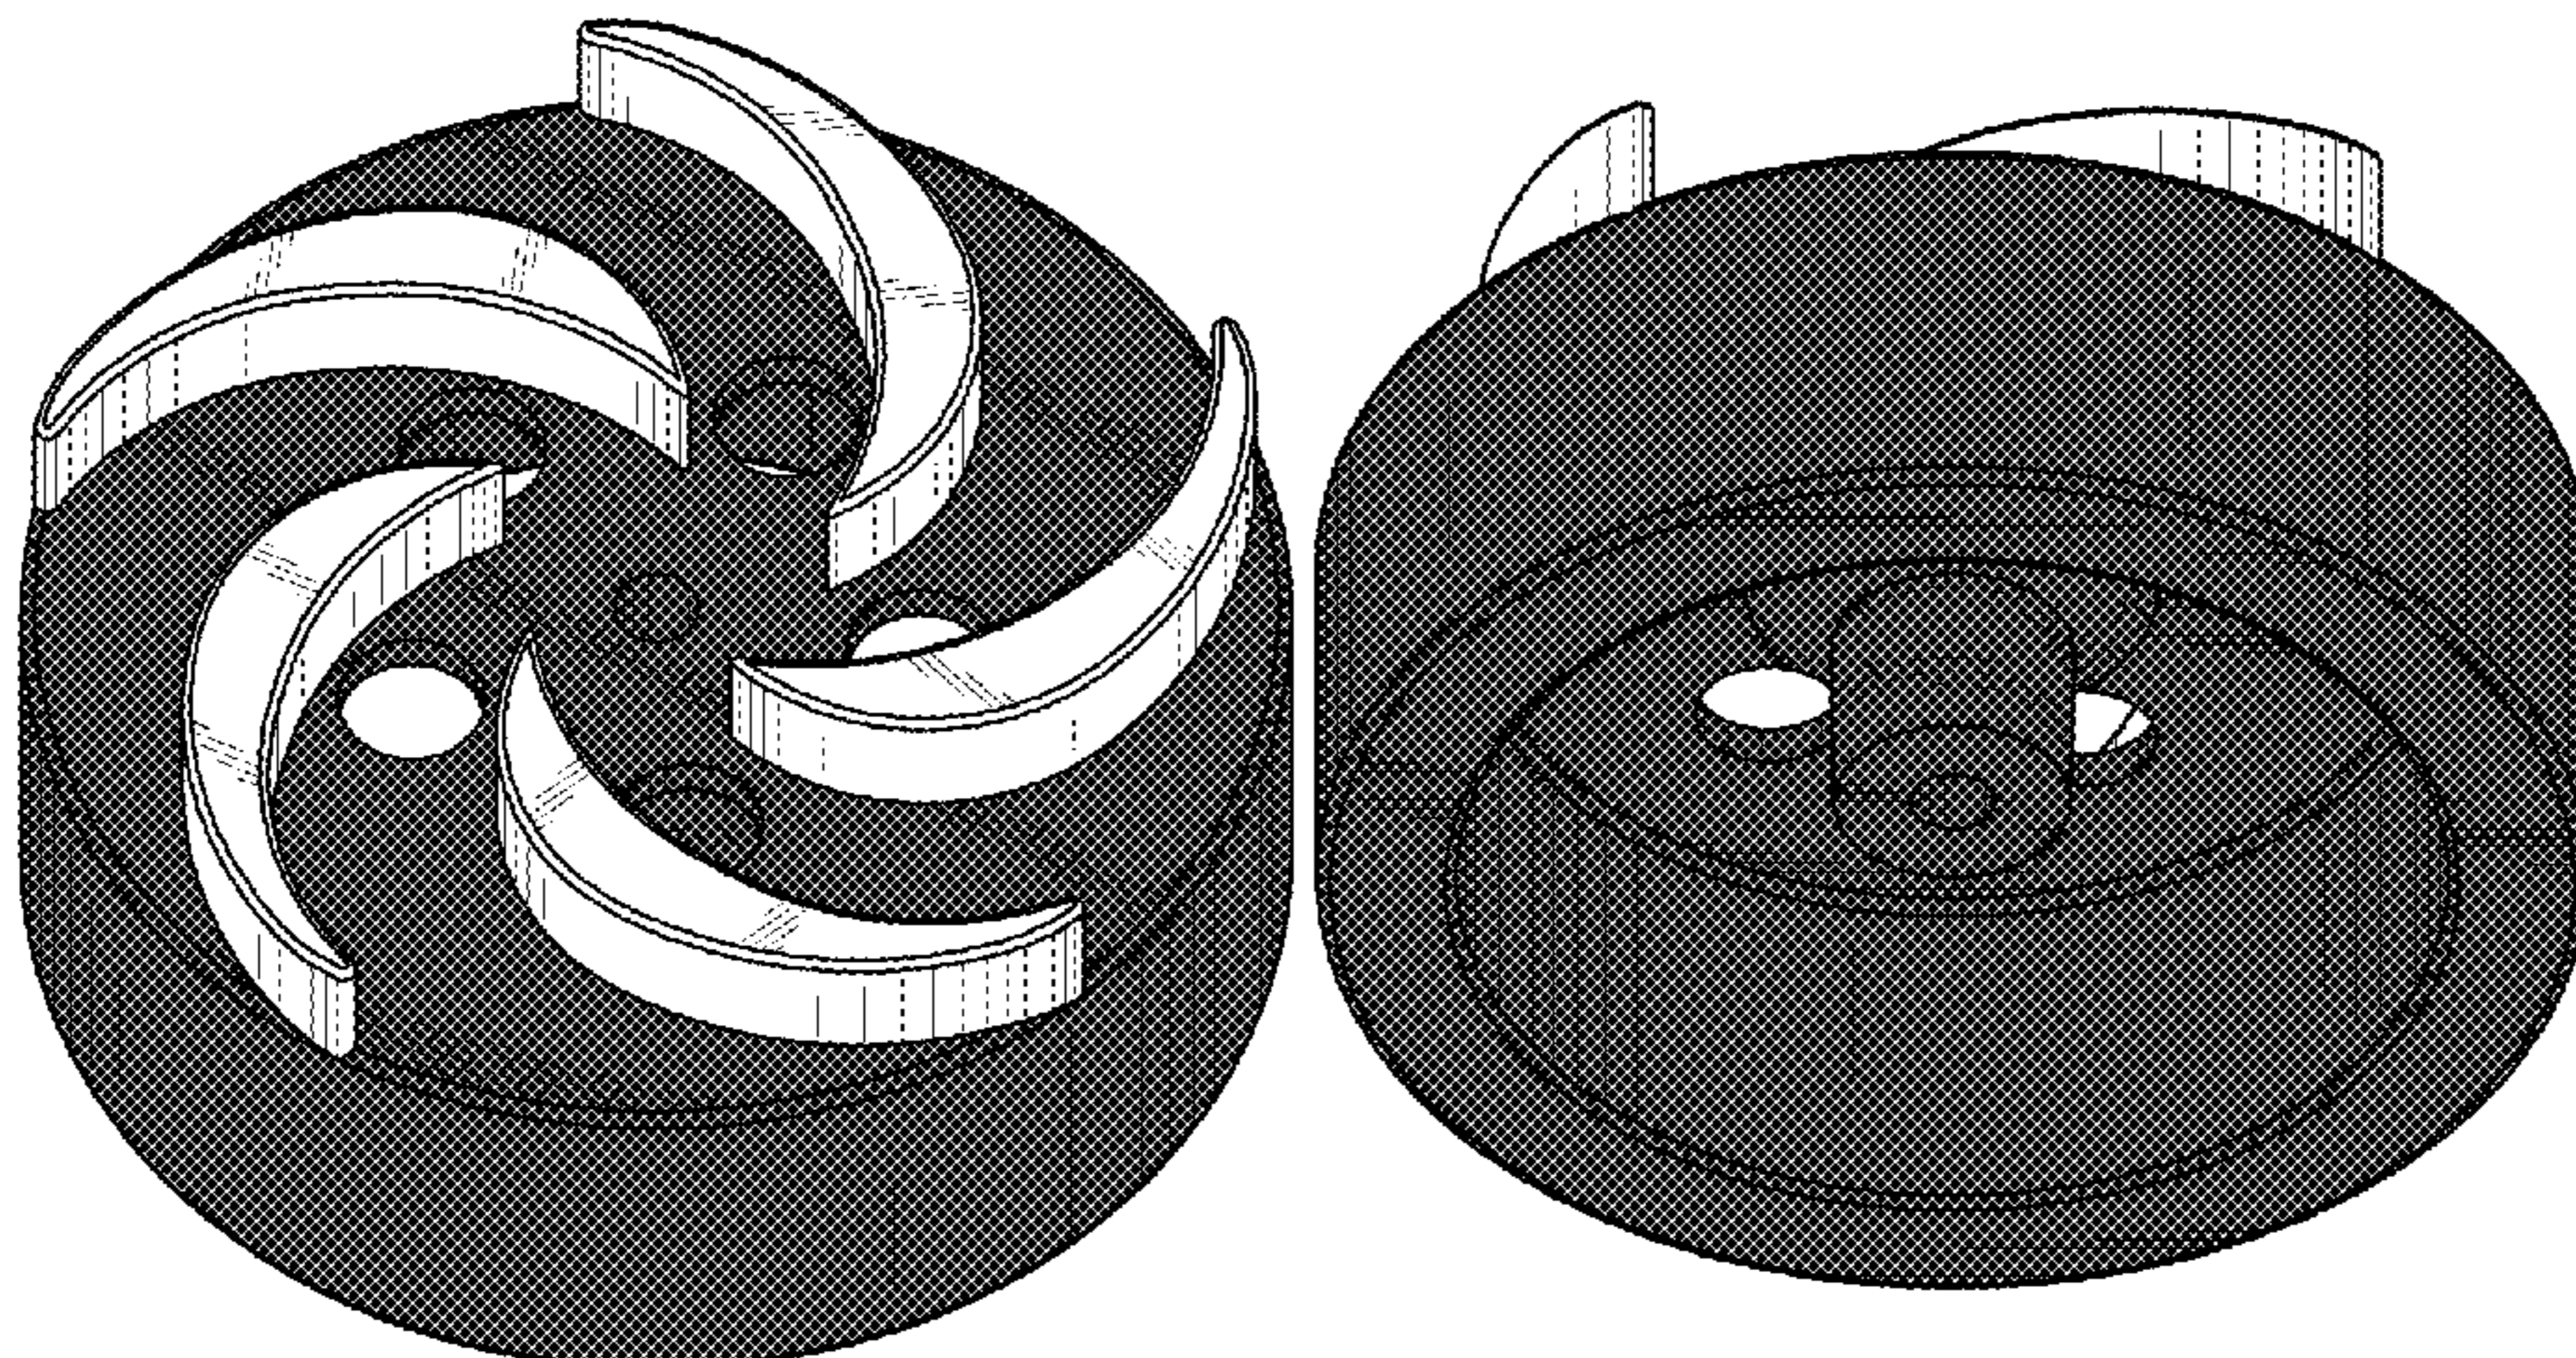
is a top, front and right side perspective view showing a fourth embodiment of our new design;
